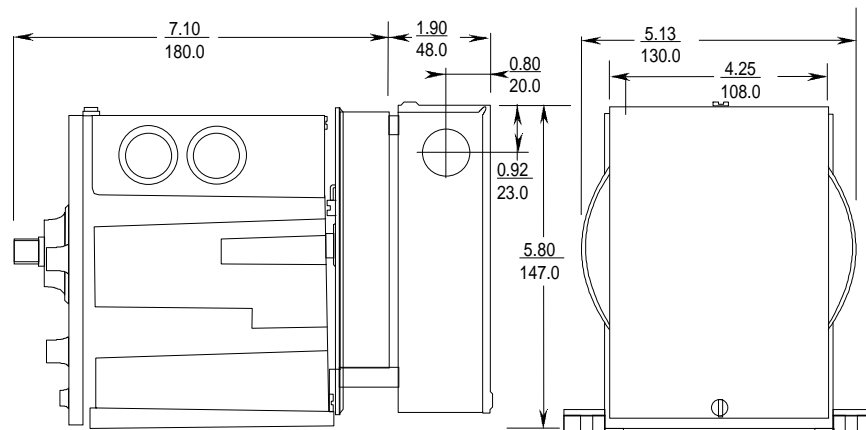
Spring Return with Switch Kit Dimensions inches/mm
